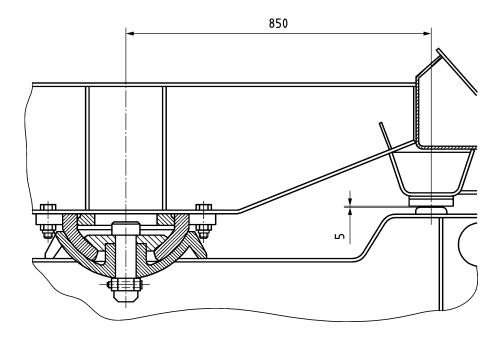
Unsprung side bearer for 2-axle steering axle bogie
